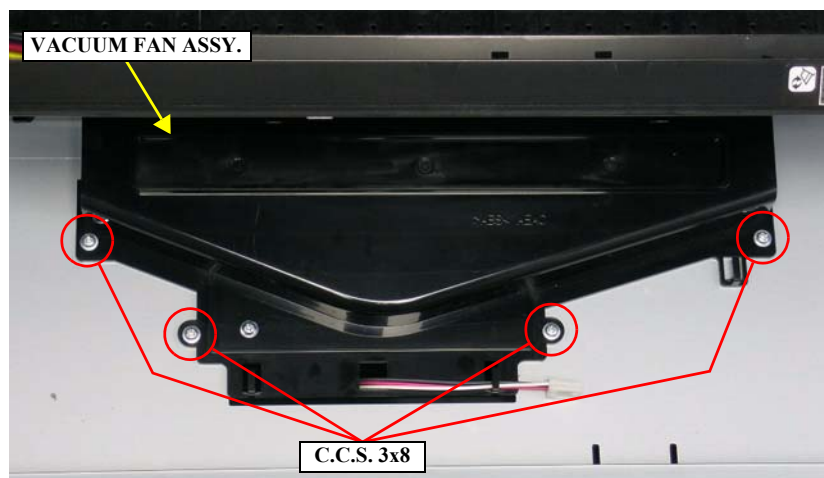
Screws Securing the VACUUM FAN ASSY.
